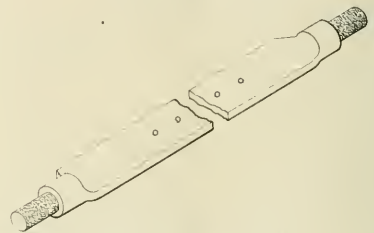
Building Up Brake Shaft Ends; Electric Welding Preferred
